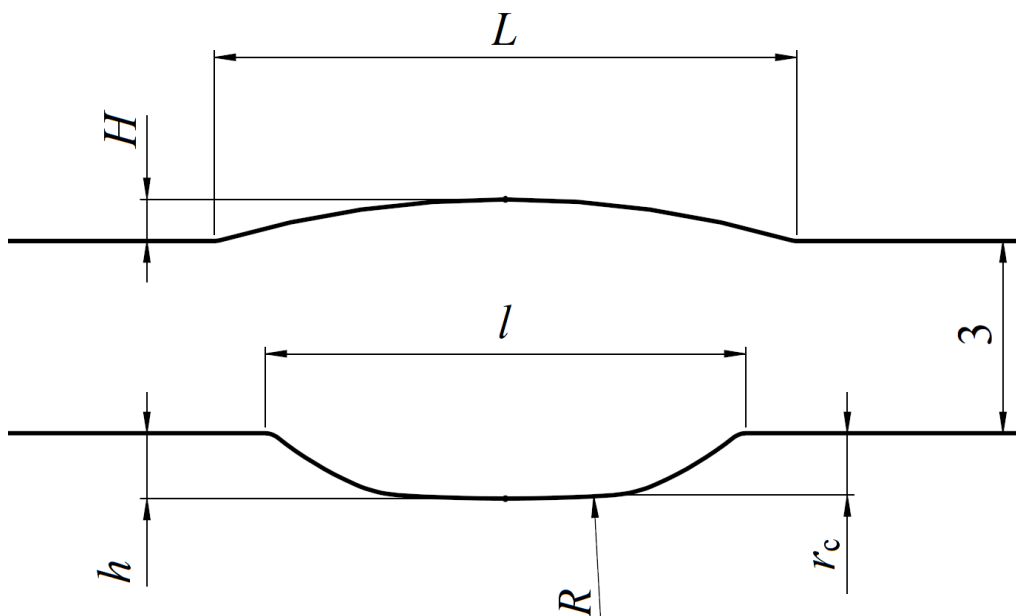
Sketch of the final butt joint weld geometry in the 2D detailed model
